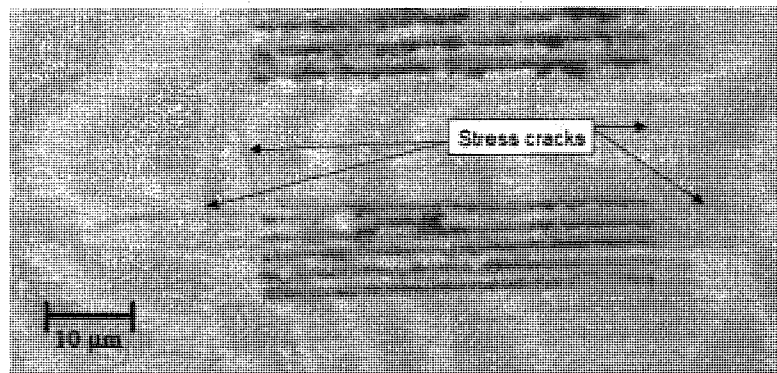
Microscope image of Si mold after molding experiment shows stress cracks around mold features.
